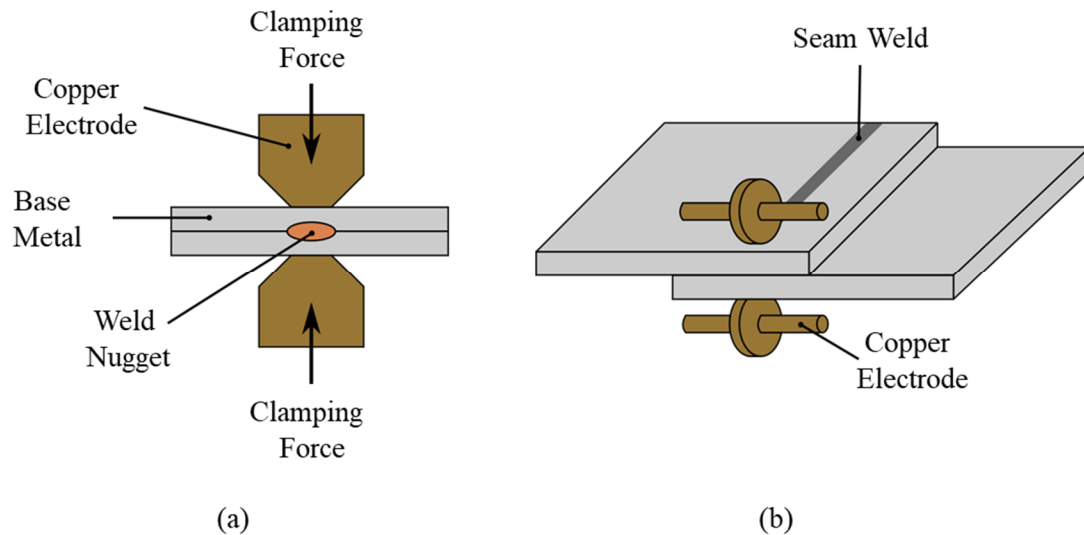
Schematics of (a) resistance spot welding and (b) resistance seam welding
